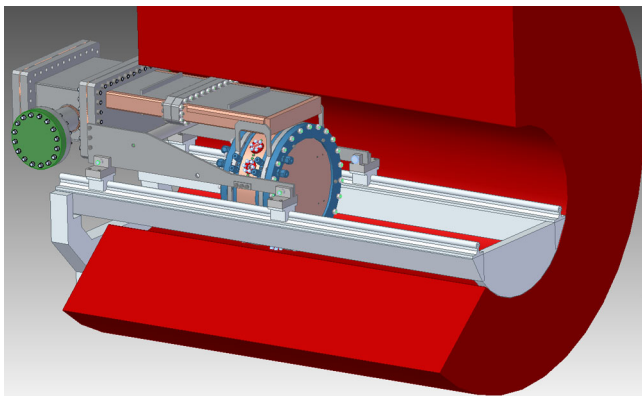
Cavity mounted in MTA solenoid bore. False colors indicate: cut view of MTA solenoid (red); support rails (silver); vacuum pumping port (dark green); rf pickup and instrumentation ports (red).
